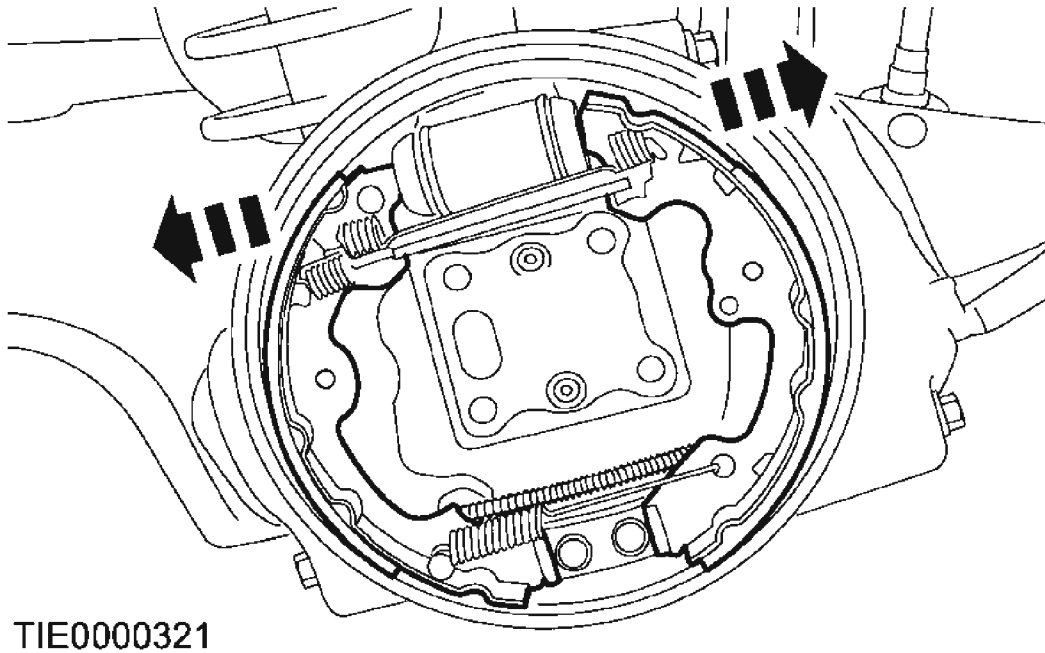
Using Suitable Tool To Hold Wheel Cylinder Pistons In Place
